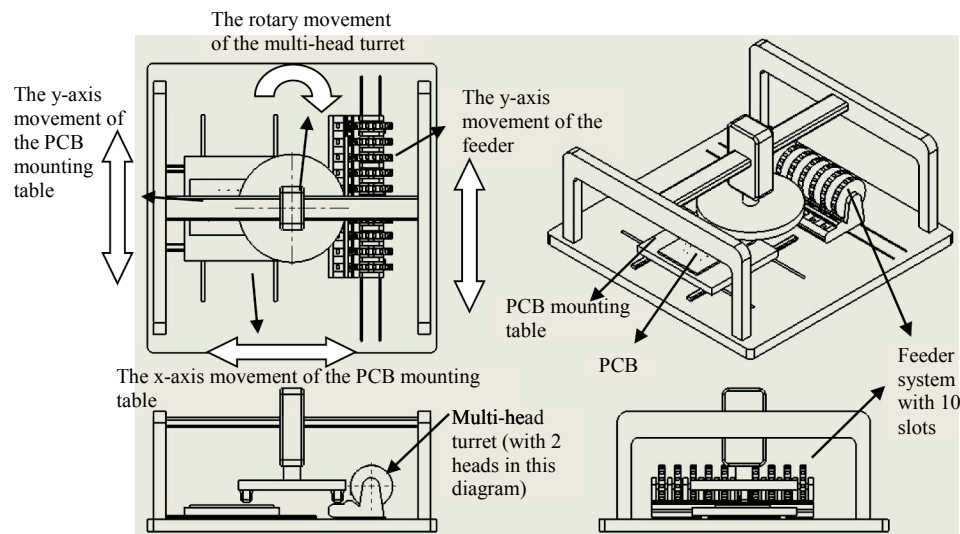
PCB assembly machine of the MBTD type (with 2 Rotary Turret Heads, 10 Feeder Slots and a Moveable Assembly Table).
